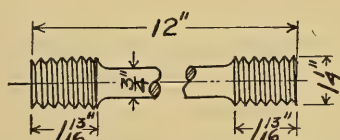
TENSION SPECIMEN FOR CAST ZINC.
